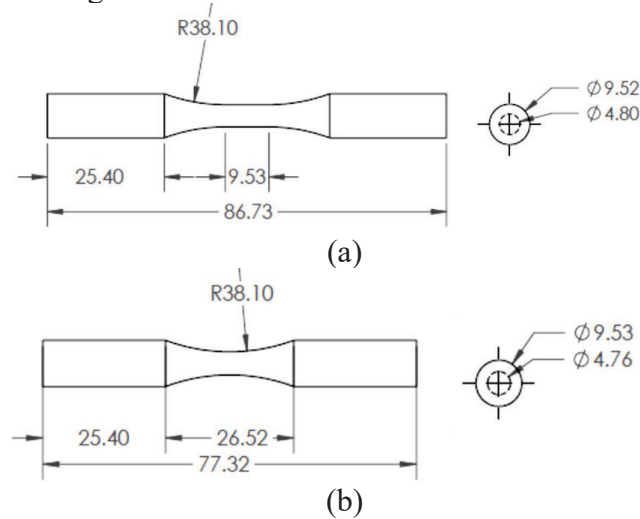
Specimen geometries and dimensions for (a) axial and (b) rotating bending fatigue tests. All dimensions are in mm.
